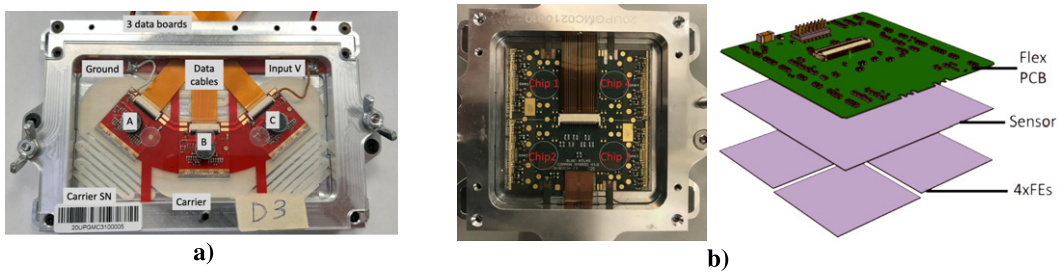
A triplet module and a quad module, showing the different positions of the sensors and especially the readout chips. (a) An assembled triplet module. (b) An assembled quad module and the exploded view of the schematics of a quad module.
